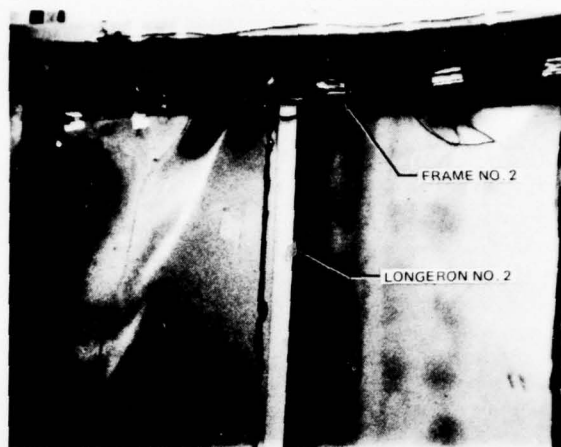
BONDED SHEAR PANEL FAILURE DETAIL
